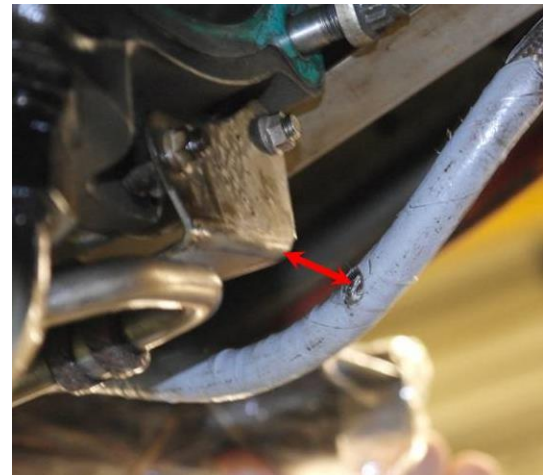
MATCHING ARC BURN DAMAGE ON POWER FEEDER CABLE AND OIL LINE BRACKET
